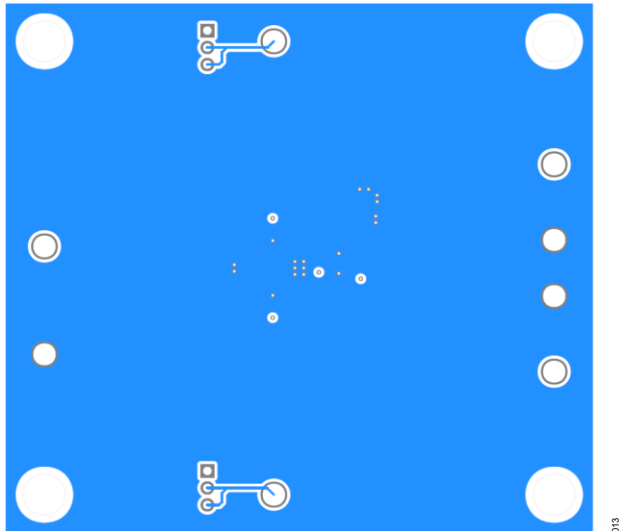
EVAL-ADPL31613-AZ PCB Layout—Bottom View
